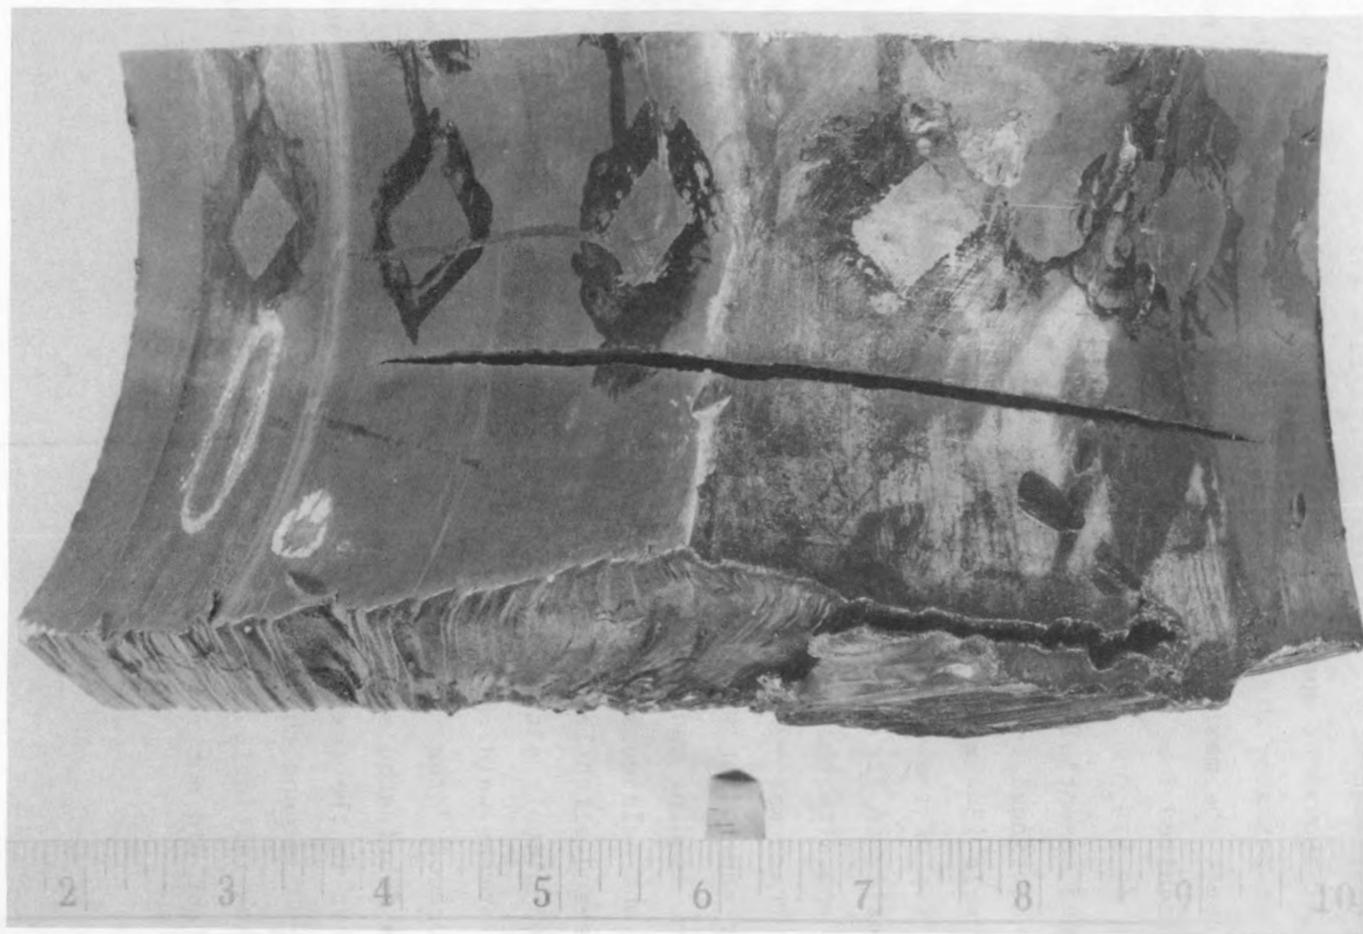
View of inside surface fatigue-failure crack for T-13 after removal for posttest examination.
